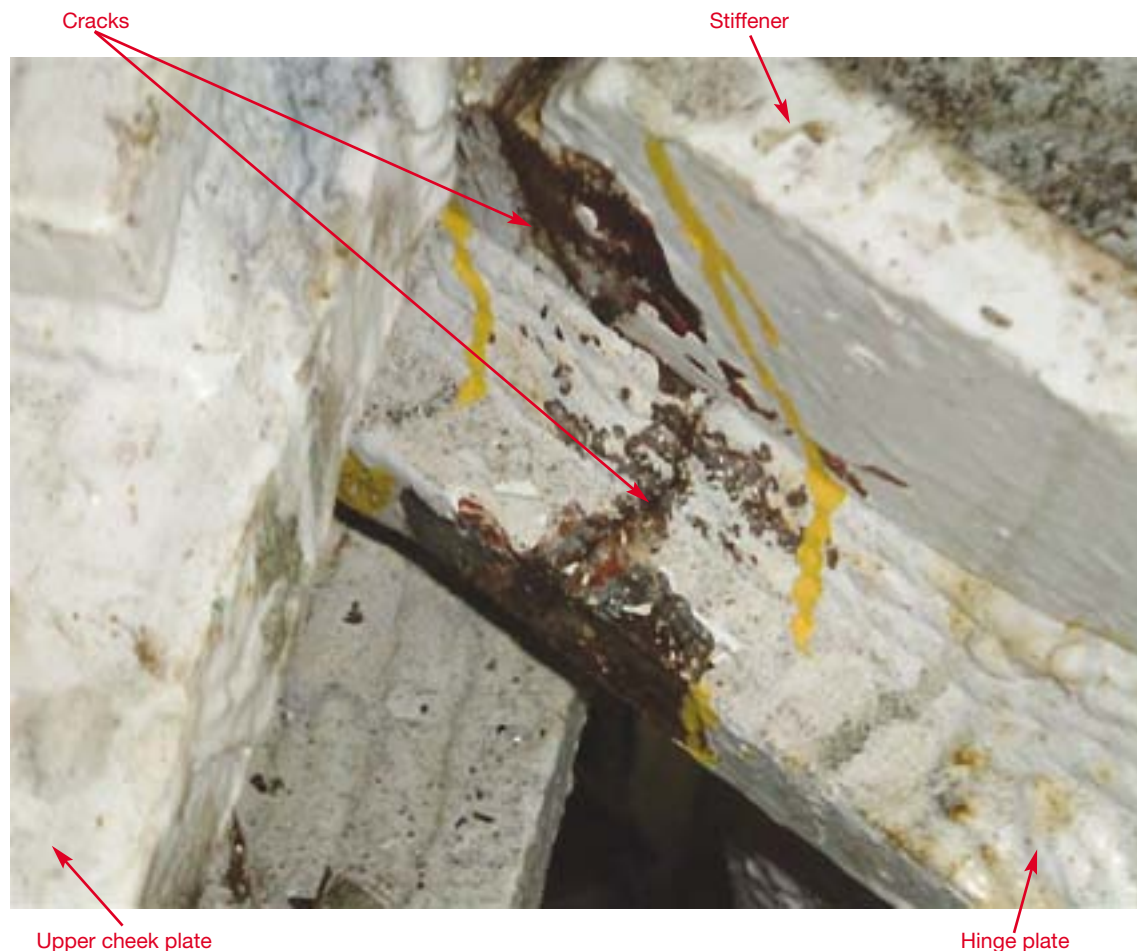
Starboard door upper bearing hinge in detail showing crack
